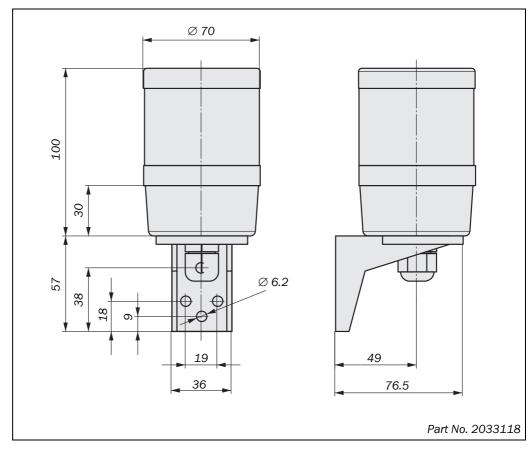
Dimensional drawing muting lamp, version with incandescent lamp (mm)
